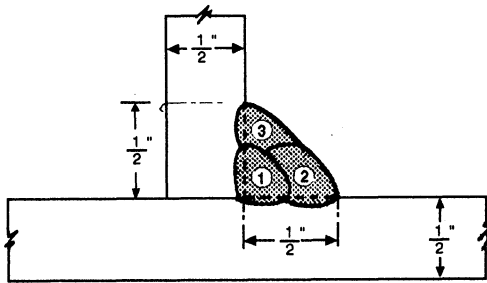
Order of making string beads for a tee joint in heavy plate.
